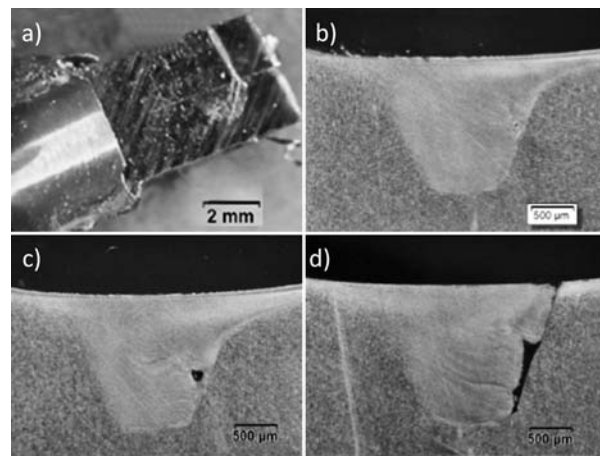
The influence heat input during FSW (at 37 mm/min welding rate, using tool A) on appearance of elongated cavities; a) FSW welded sample, b) RPF = 51,3 rev/mm, c) RPF = 31,9 rev/mm and d) RPF = 16,2 rev/mm
